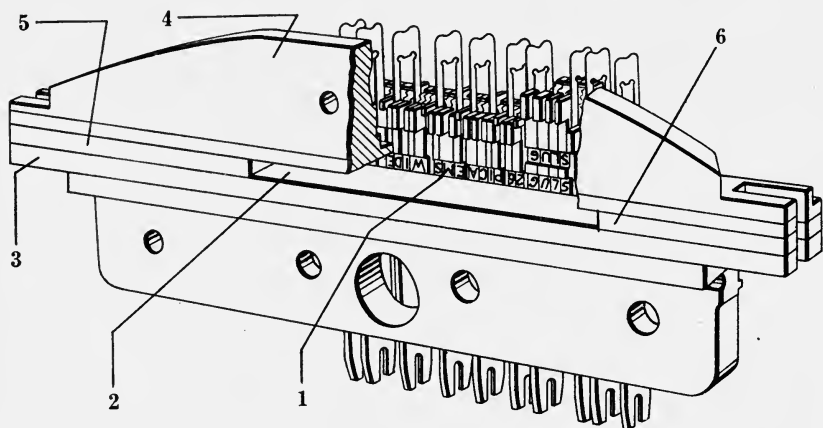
How a Slug is Formed. Here is a line of matrices fully justified and locked up tight against an Intertype mold.
